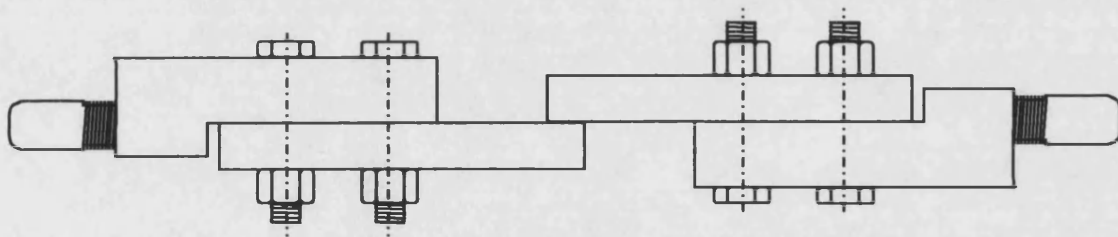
Assembly of samples for the thick adherend shear test according to ASTM D 3983.
